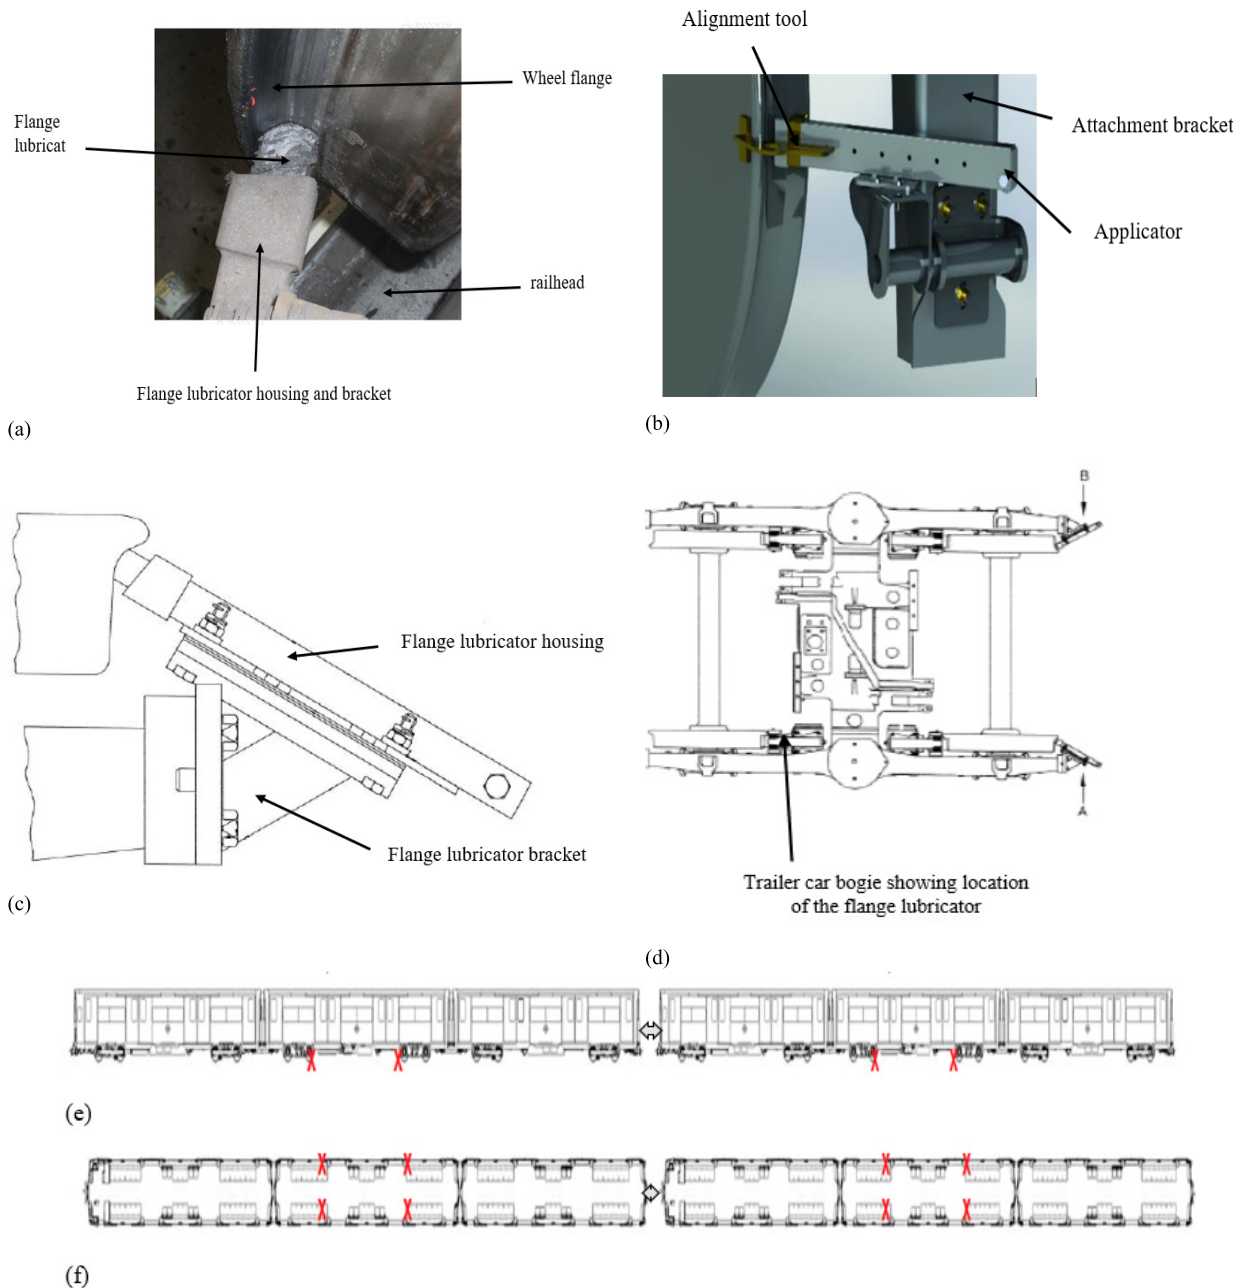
Underframe of fleet layout with flange lubricators (a) Illustration of flange lubricators at wheel contact. (b) Active wheel and flange contacts. (c) Detail of the lubricator housing assembly. (d) Location of the lubricator underneath the trailer bogie. (e) Location from the sideview on a trailer car of a six-car train and (f) location underneath a trailer of a six-car train [9], [10].
